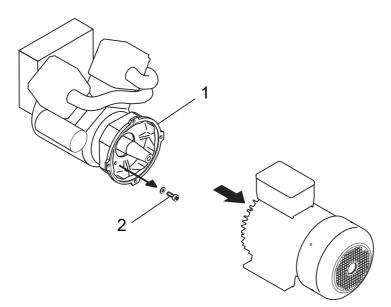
Disassembly of brushless single-bearing generators with tension bolts (2)
